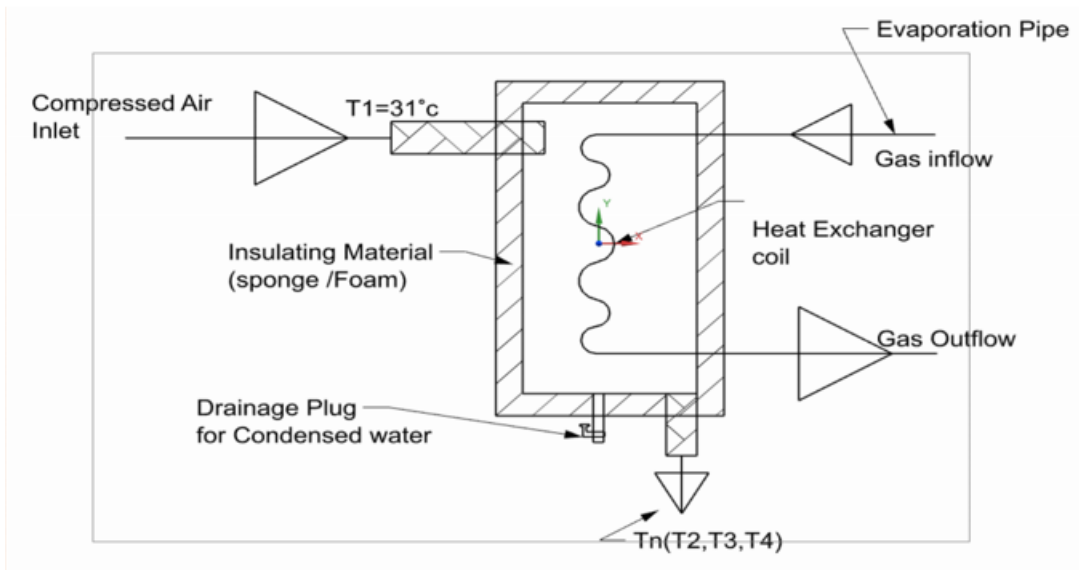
Illustration of the heat exchange chamber of the Simple Chiller
